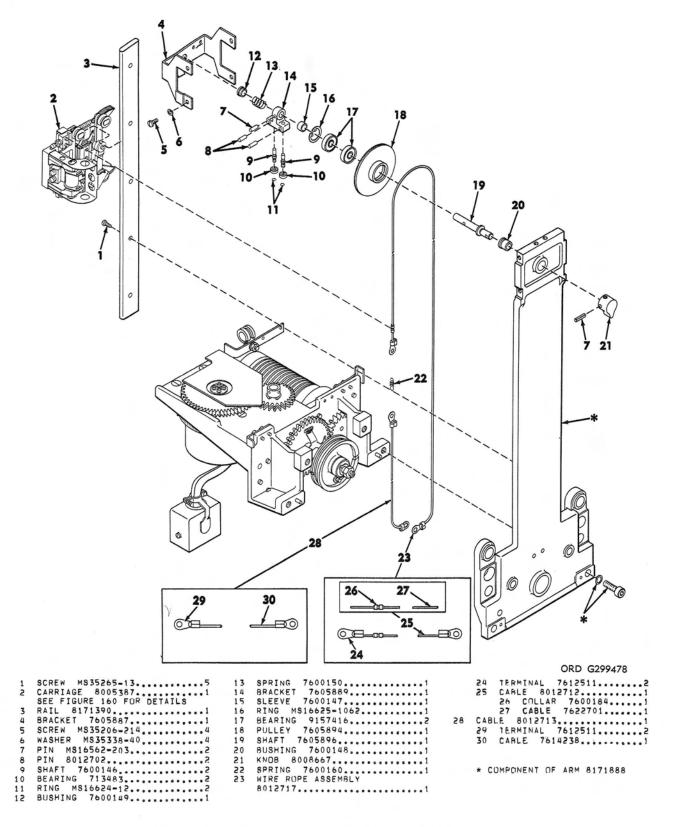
CARRIAGE, PEN /8171889/-PARTIAL EXPLODED VIEW
